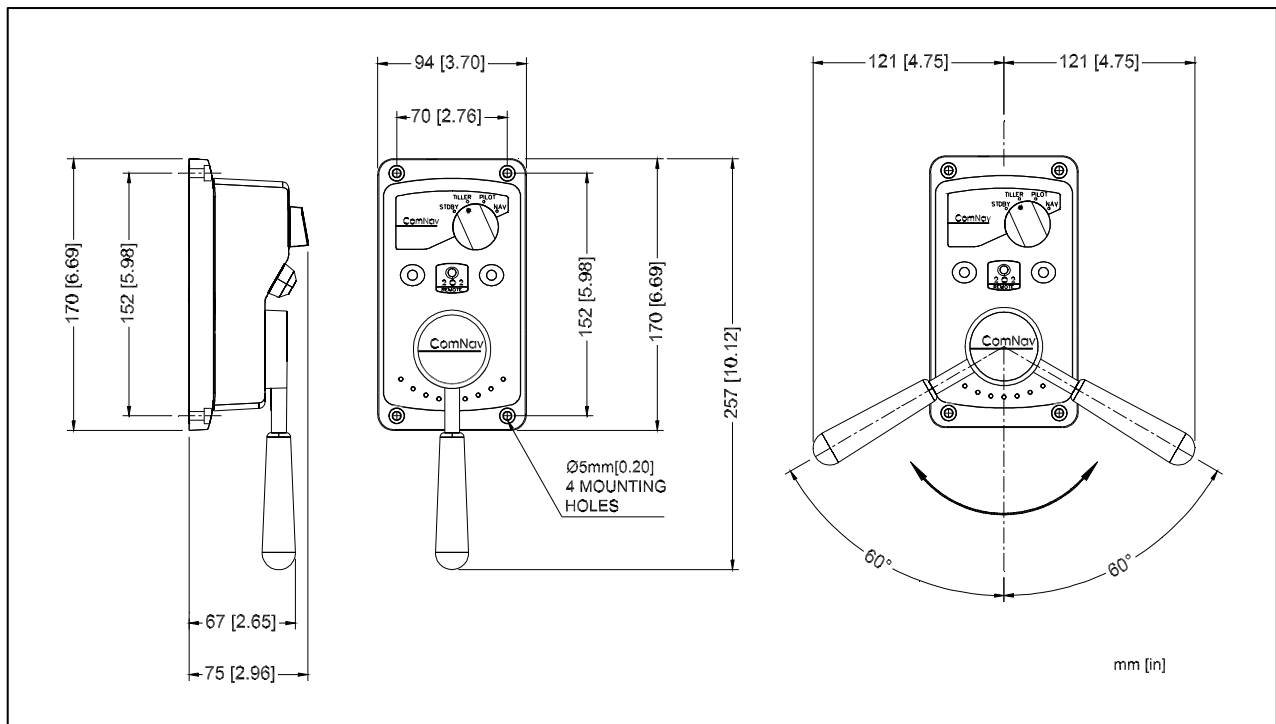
Detail Dimensions for TS-202 FFU Lever Remote
